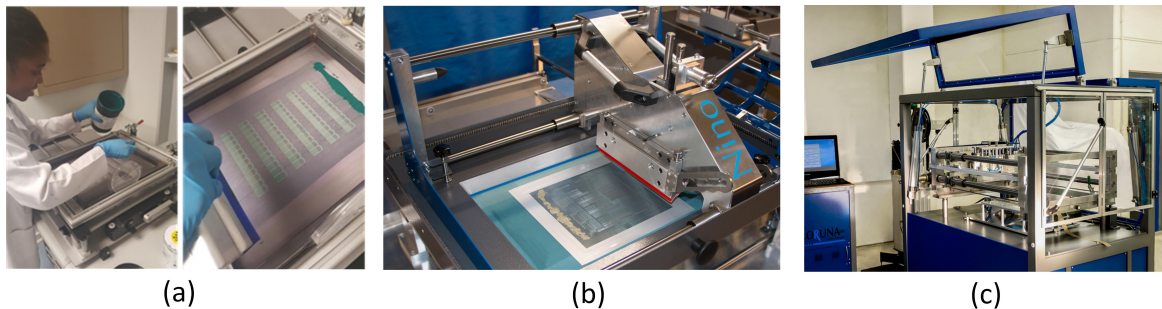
a) Manual sheet screen printing process, b) semi-automated sheet by sheet screen printer (Nino – High Precision Screen Printer by Coruna Printed Electronics GmbH, Switzerland), and c) automated screen printer set-up capable of reel-to-reel printing (Risto RtR – High Precision Screen Printer by Coruna Printed Electronics GmbH). Adapted from [20] with permission from Springer Nature.
